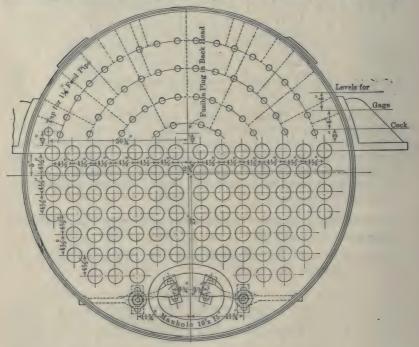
Tube-spacing in a Horizontal Boiler.
